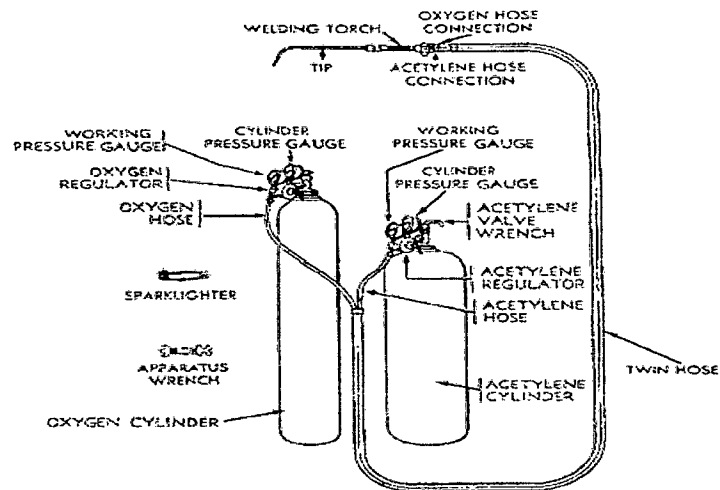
Portable oxyacetylene welding and cutting equipment
